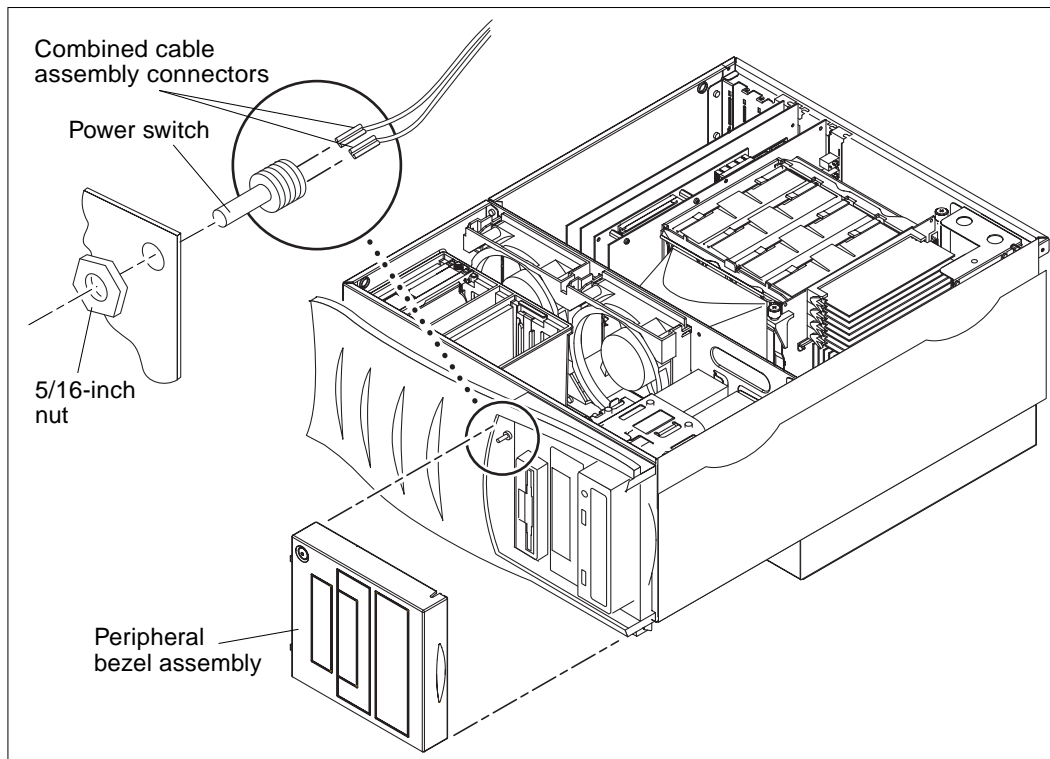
Removing and Replacing the Power Switch Assembly
